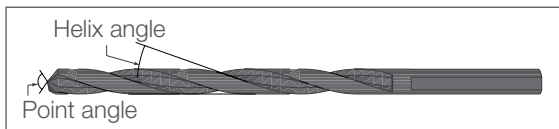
Drills for Marpet-a FS and Marpet-g FS sheets
